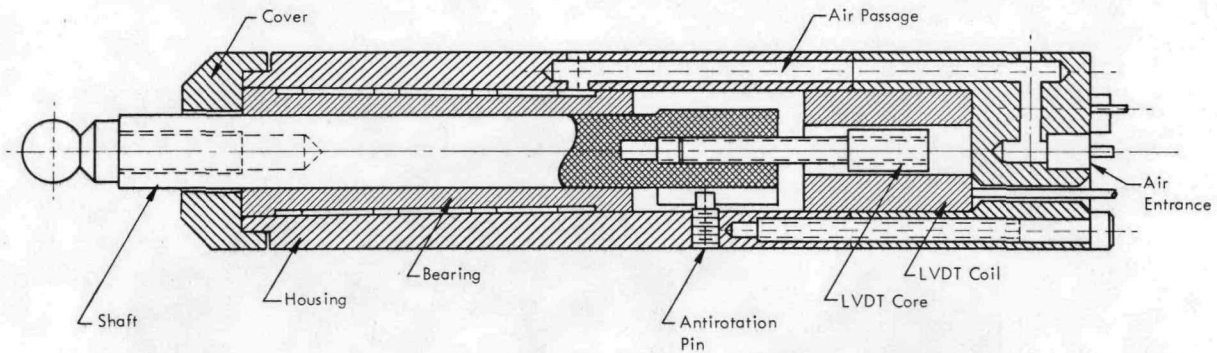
CROSS SECTION VIEW OF AN AIR-BEARING GAGE HEAD.
